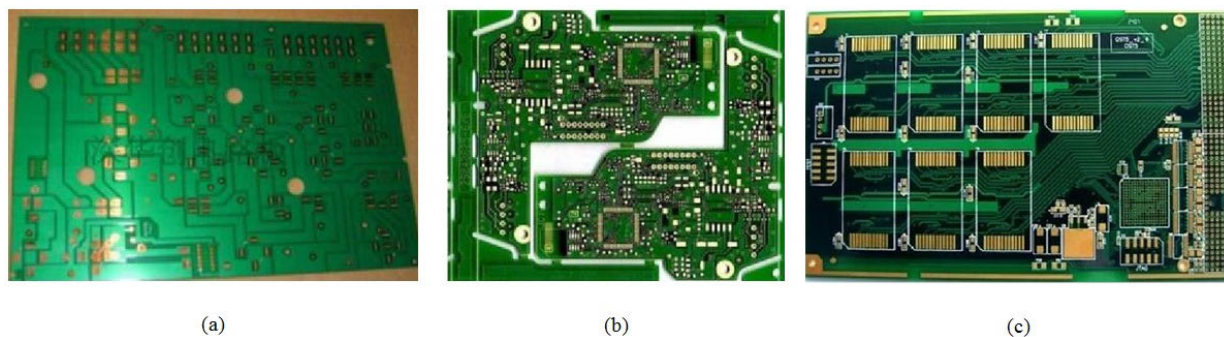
The types of workpieces (a) single layer board, (b) doubling layers board, (c) six layers board.
